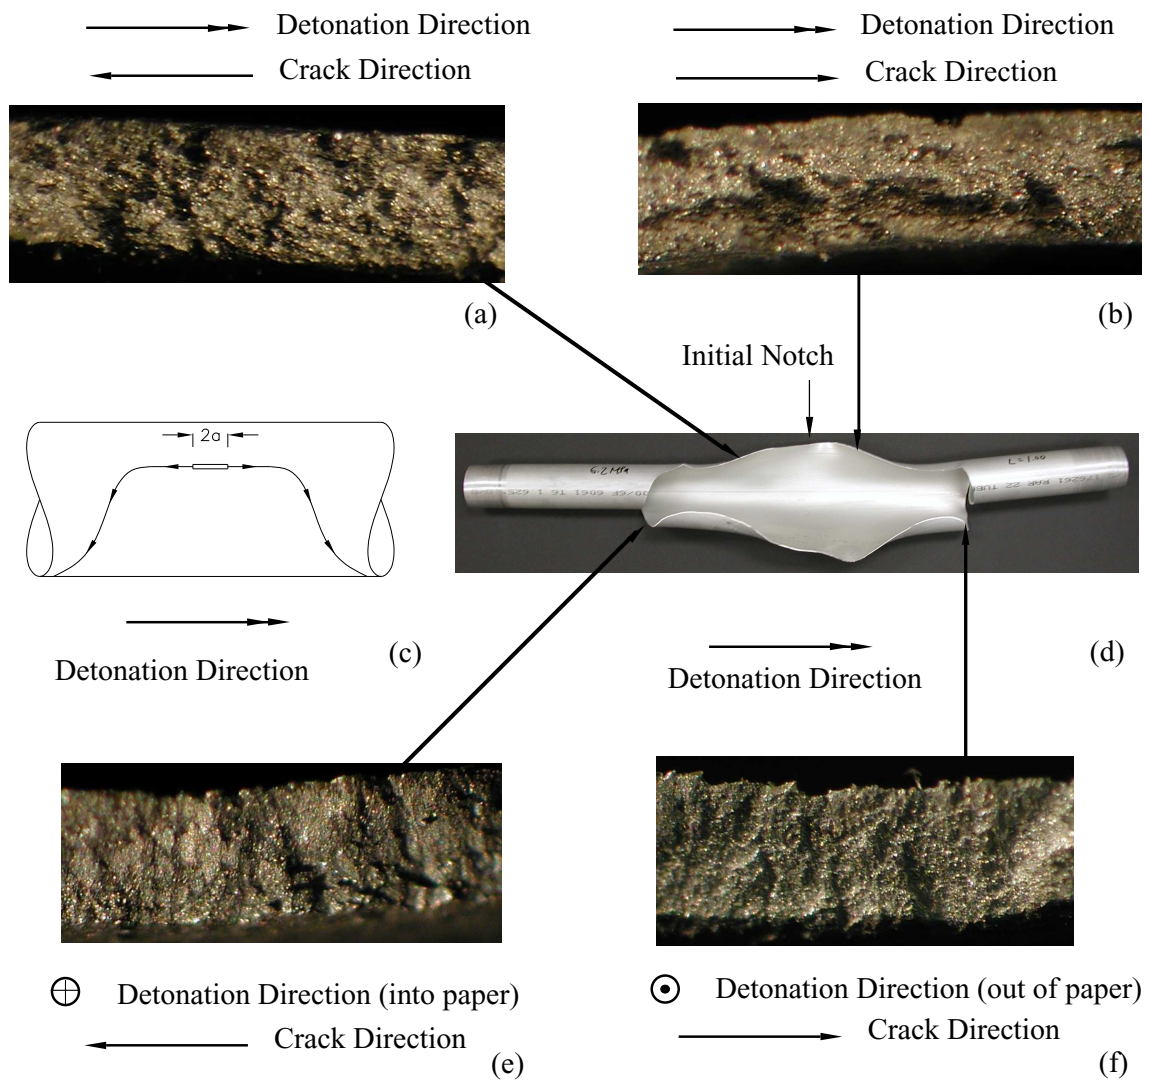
Fractographs, post-test specimen, and crack path schematic for a tube fractured under detonation loading.
